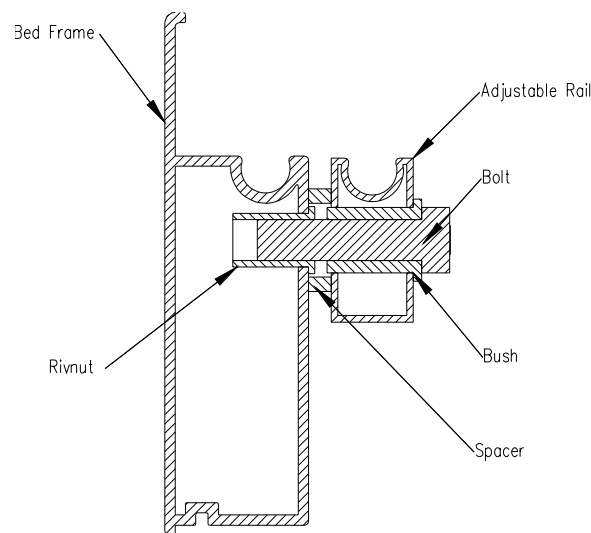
Example of pivot mounting using a bolt and bush arrangement
